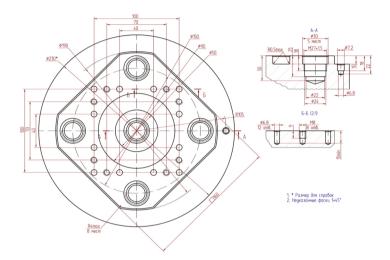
Initial data for the test part for checking the adjustment of servo drives
